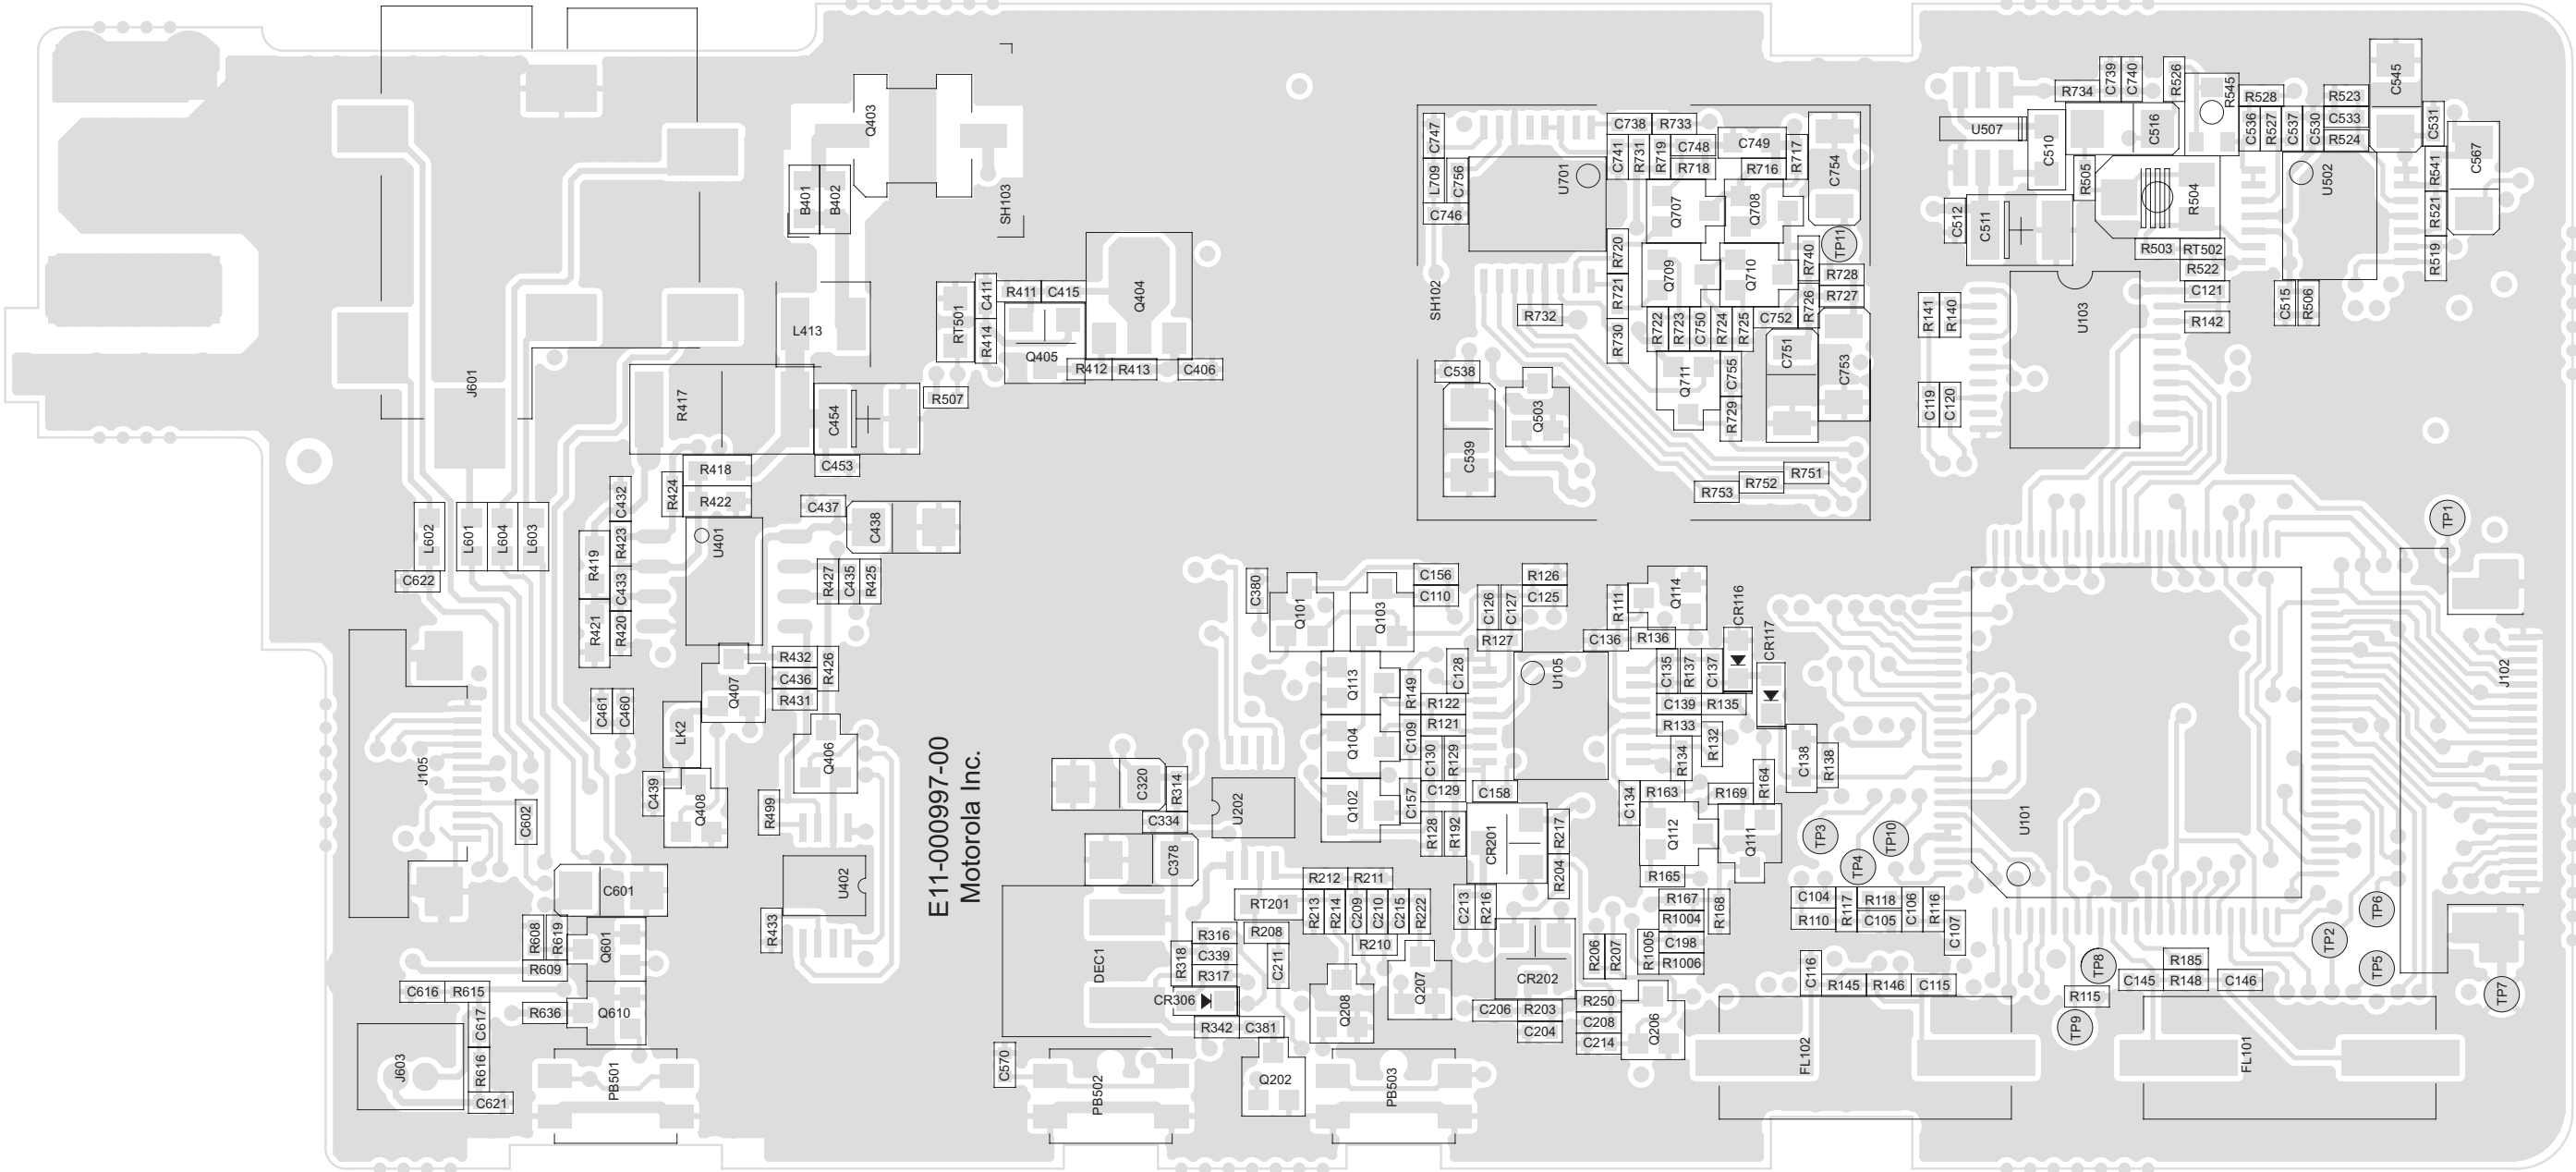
VHF (136–174 MHz) Mainboard Top Side: PCB No. E11-000997-00
